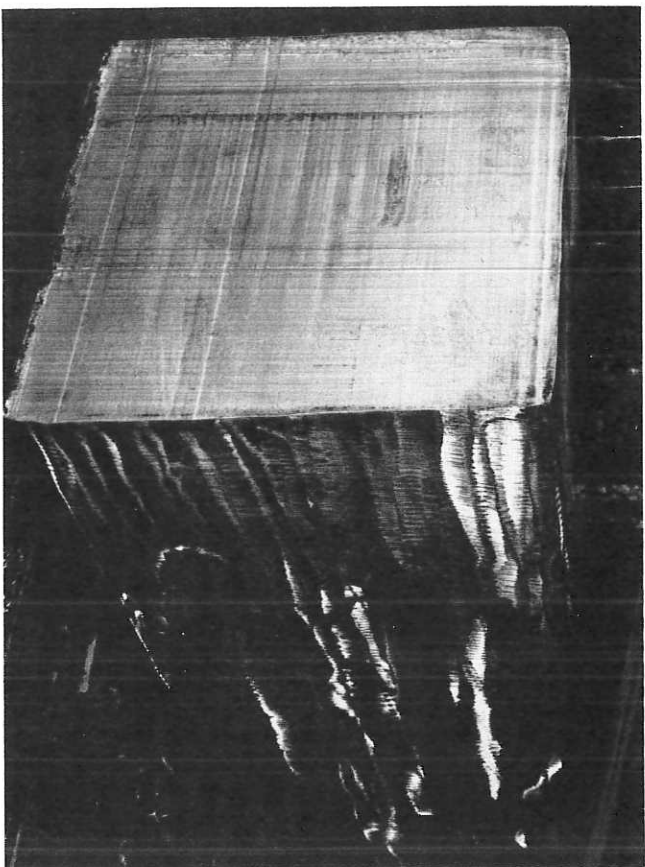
Massive billet, approximately 30 in. square, cut through with an ECM tool. (Courtesy of the Anocut Engineering Company.)
